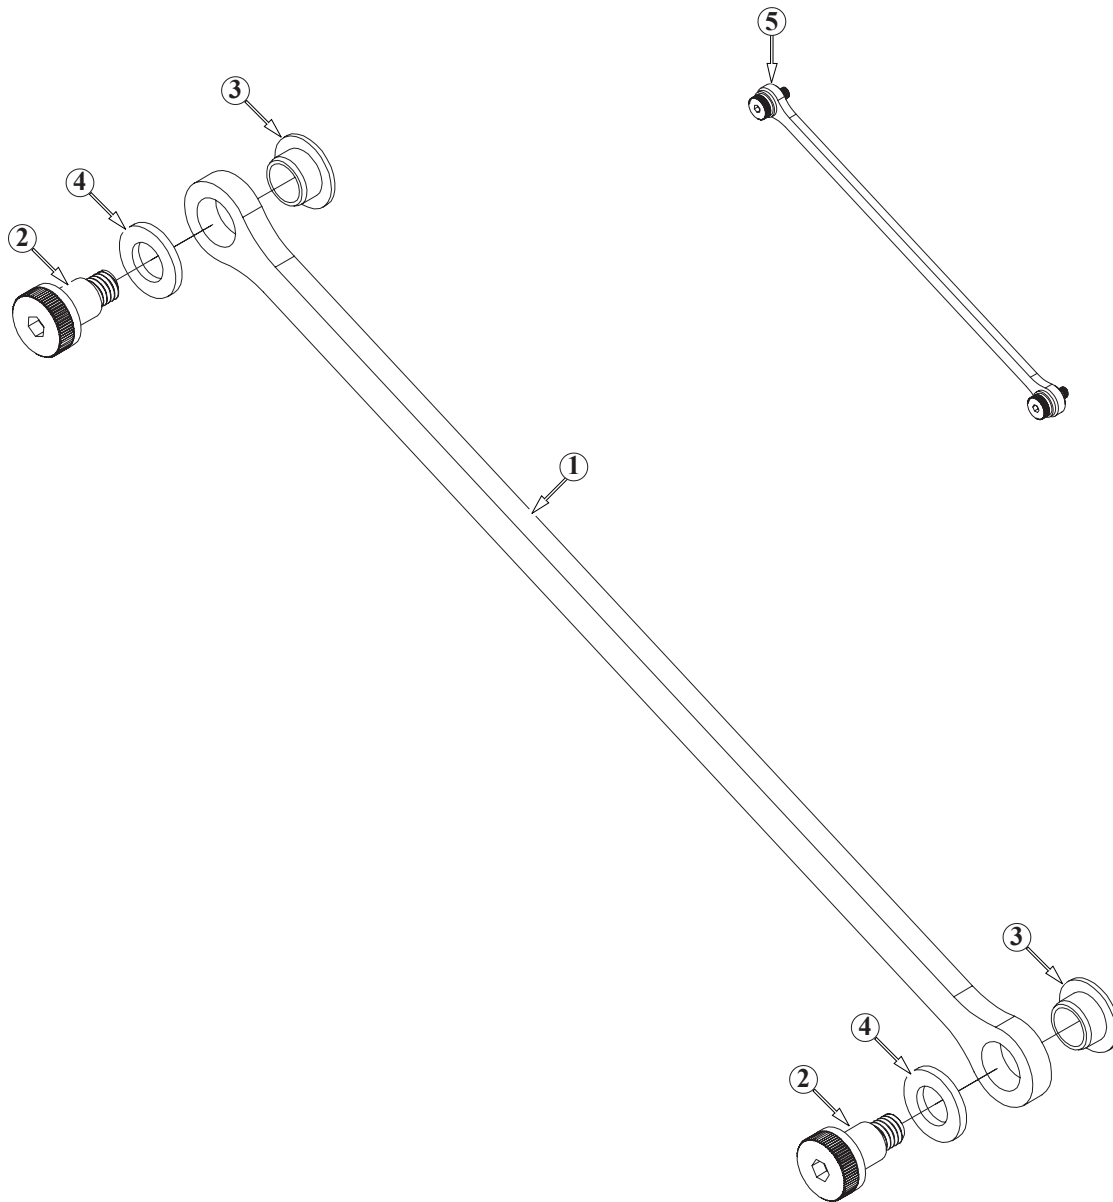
Upper and Lower Taping Head / Arm Assembly
